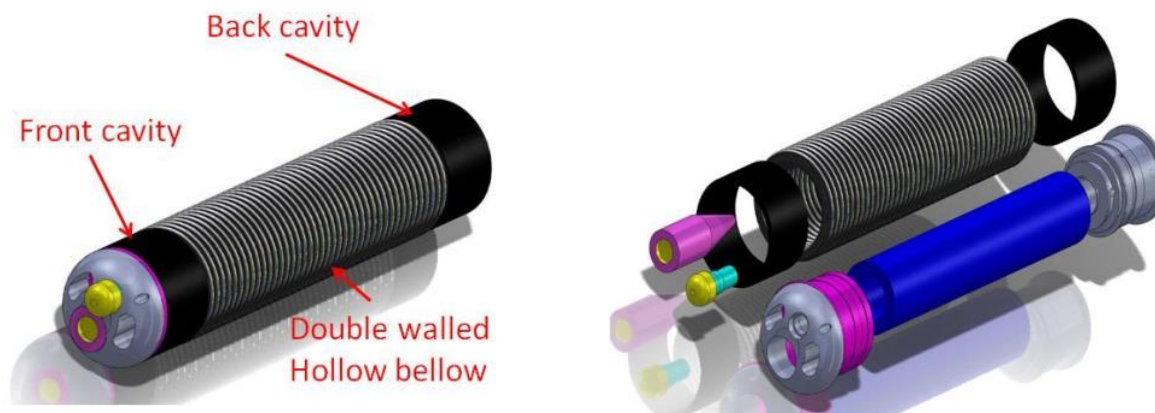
Rendering of crawler (left), exploded view of crawler assembly (right).
